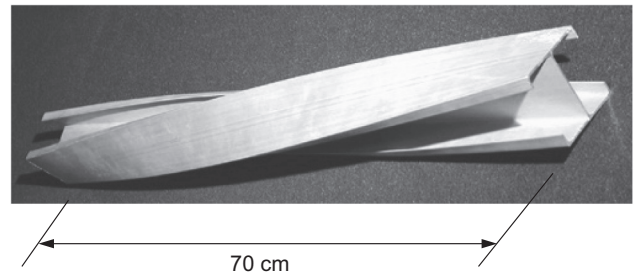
Warping and distortion of an initially two-dimensional aluminum alloy extrusion having an H-shaped cross section due to poorly configured spray quenching.
